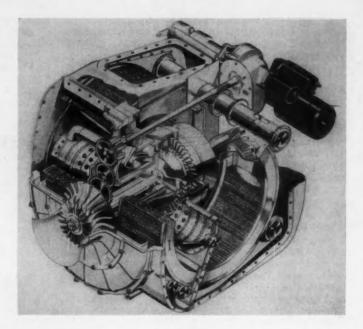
Cutaway view of GT-305 Whirlfire engine.
